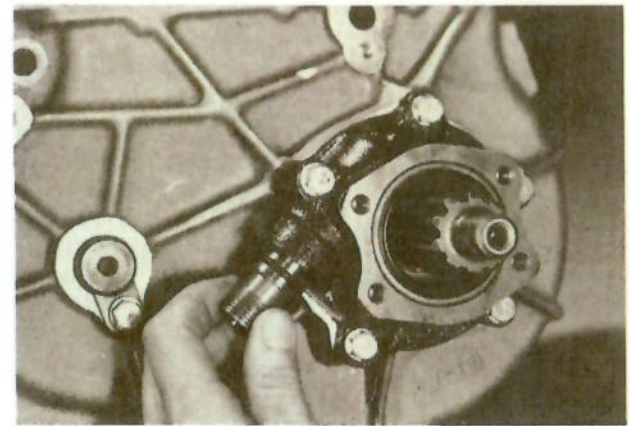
REMOVING THE SPEEDOMETER DRIVEN GEAR FROM THE SPEEDOMETER GEAR HOUSING.
